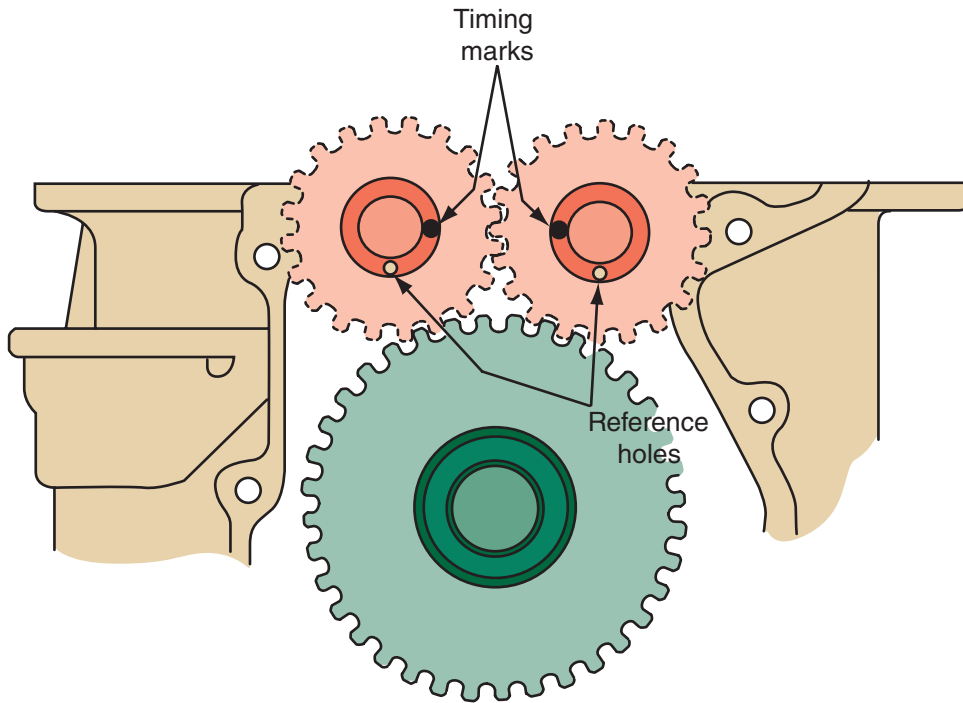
Balance shafts must be timed to each other and the crankshaft.
